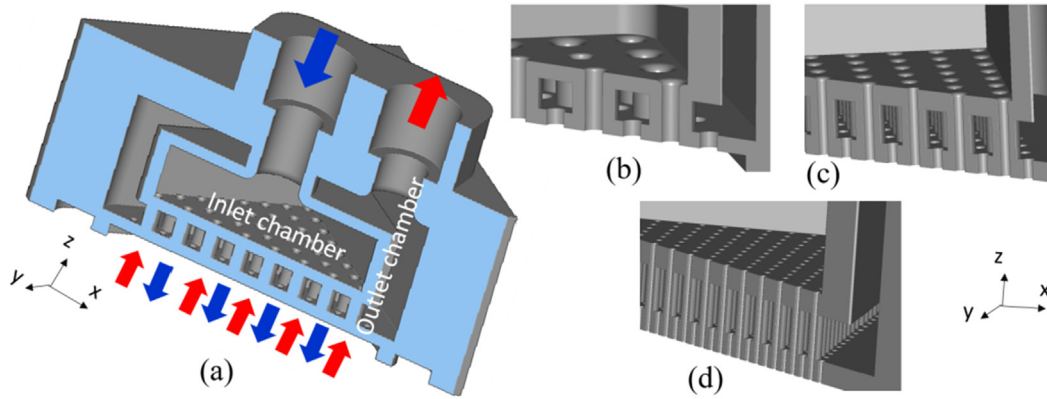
CAD (Computer-aided design) structures: (a) 8×8 array cooler with inside channels and enlarge view for three different nozzle array (b) 3×3 (c) 4×4 and (d) 8×8 .
